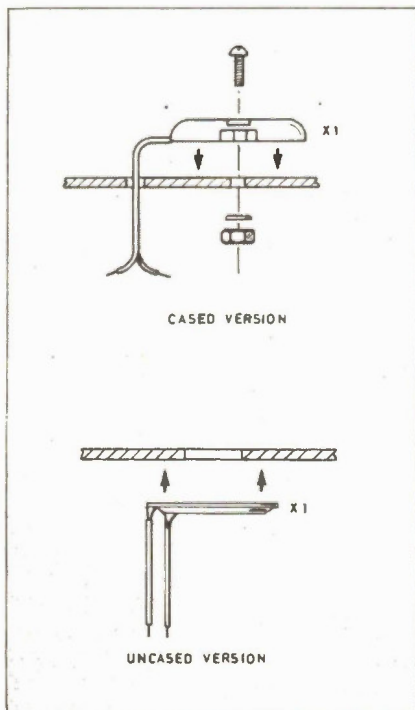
Mounting details of the two types of piezo-electric sounders.
